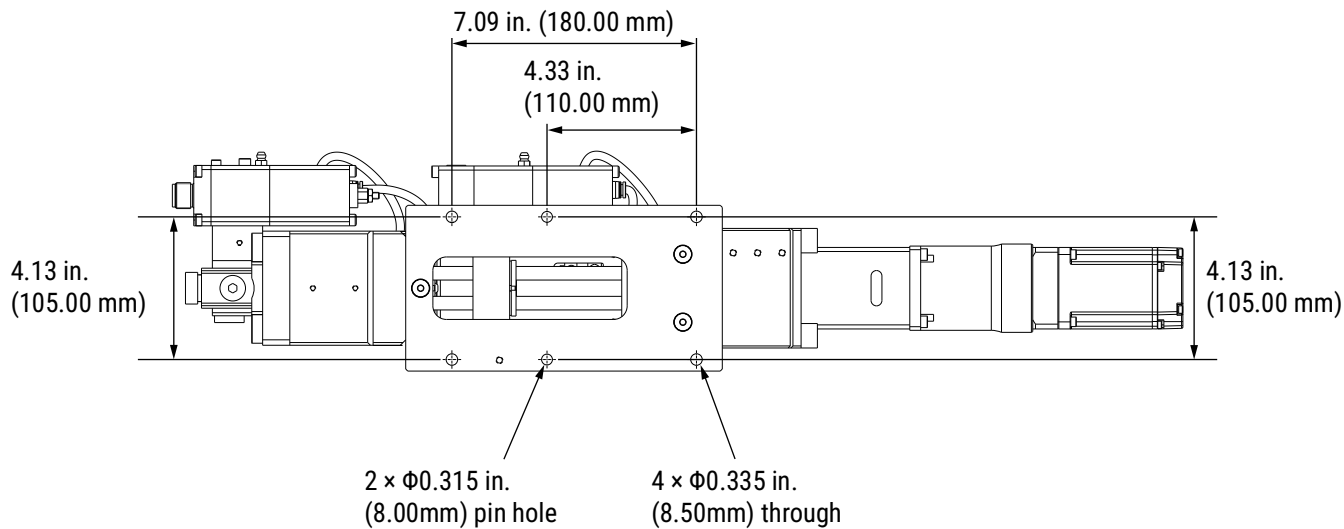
Mounting Hole Dimensions for Installing the PSM Ambient Metering Unit - 100cc
